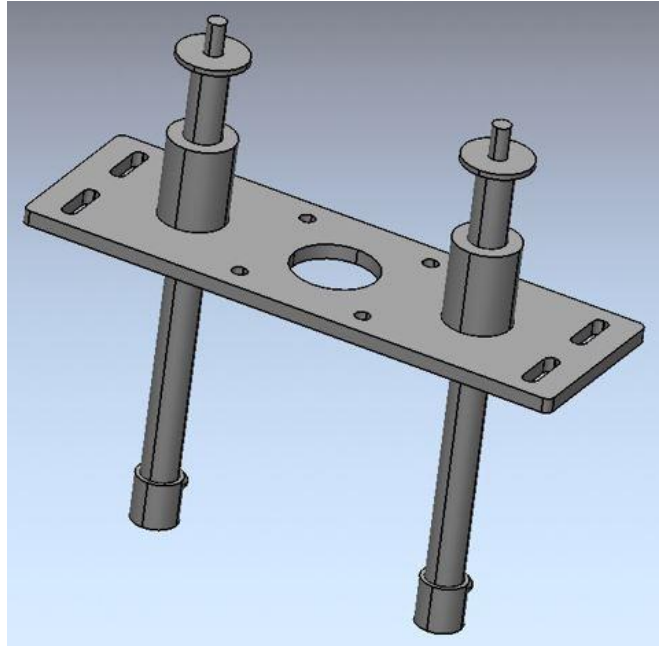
Cylinder Plate with Linear Bearings & Guide Pins
